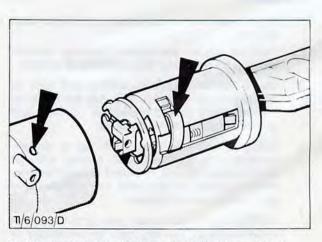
Housing and cylinder in correct alignment prior to assembly
